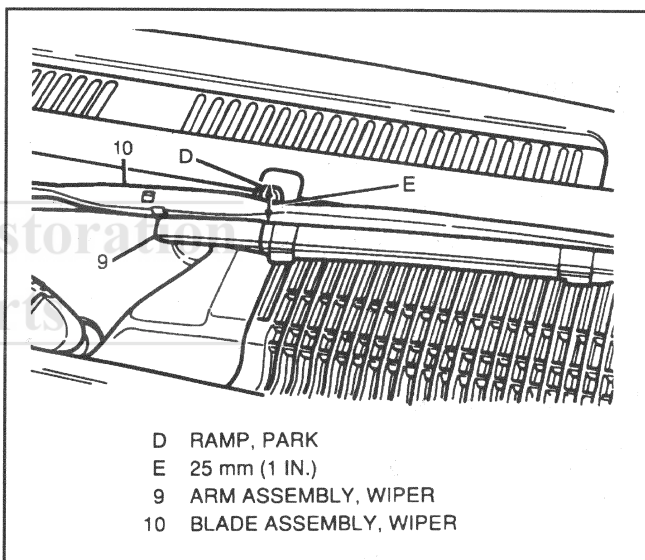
Wiper Arm and Blade Assembly Installation (Typical)
